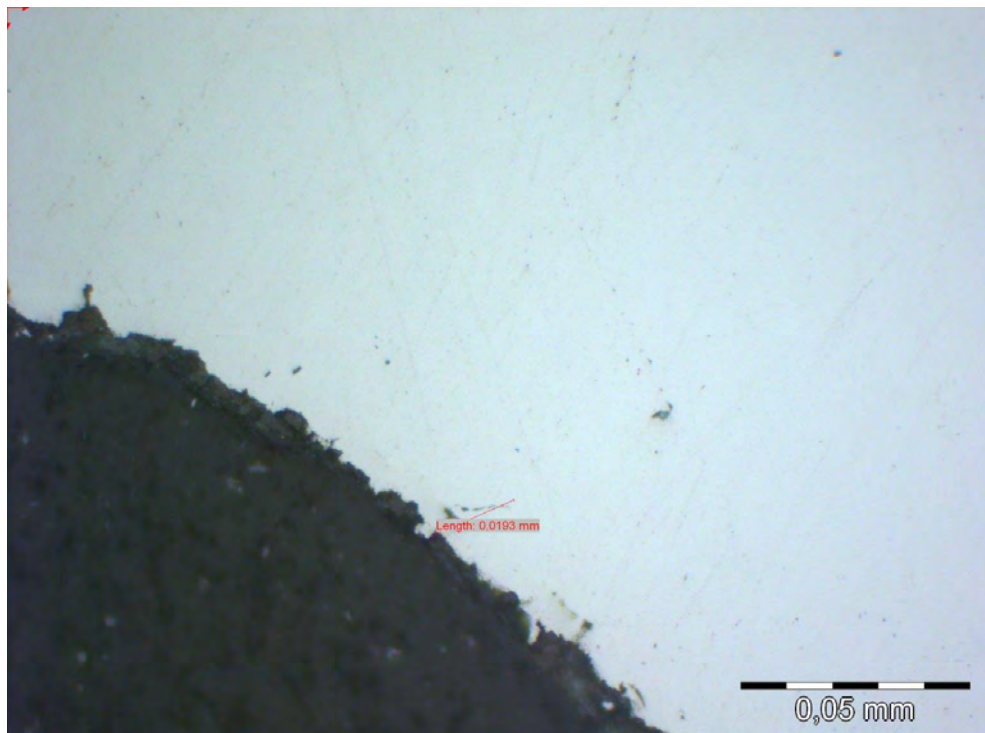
Cut four in crack at segment A, fourth ridge on barrel no. 14389
